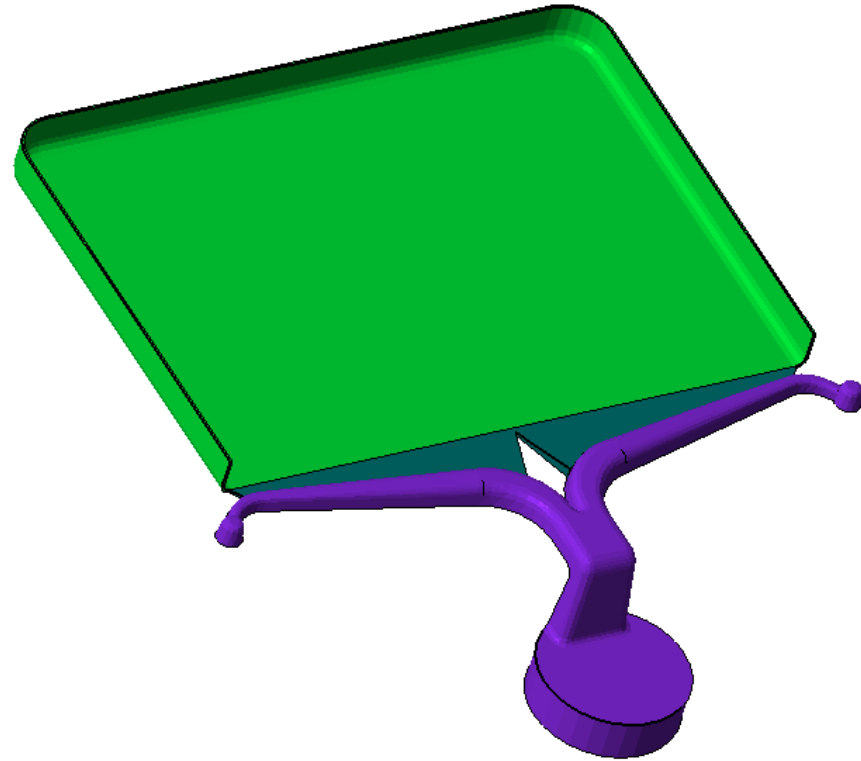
Single casting integrated from a multi-piece stamped steel liftgate inner structure.
